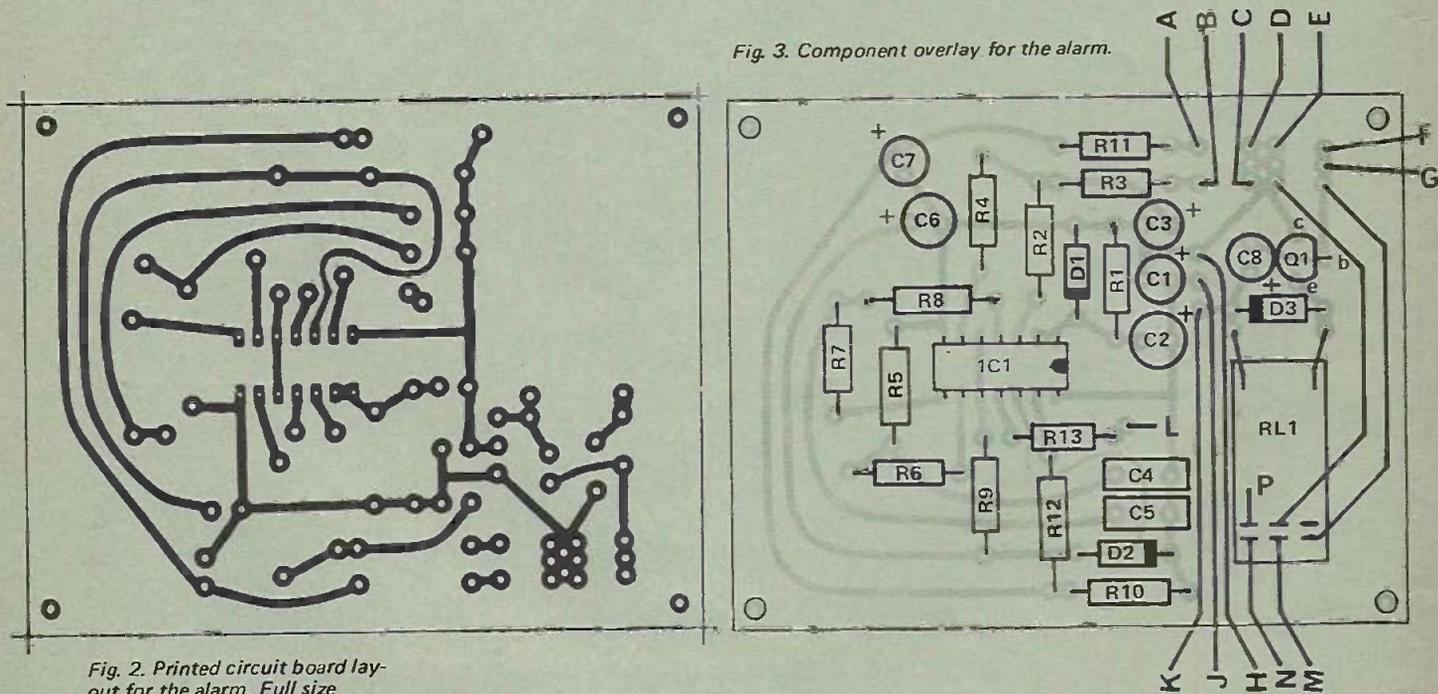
Printed circuit board layout for the alarm. Full size 90 x 70 mm.
